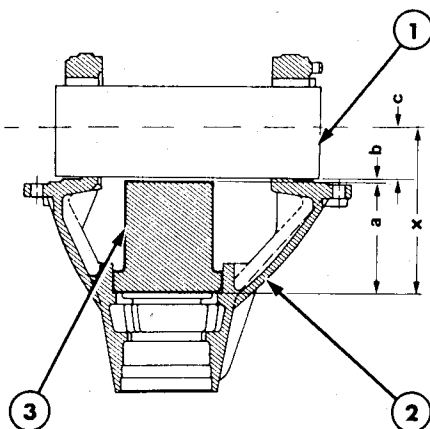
Diagram of pinion shimming tools and measuring points. Refer to text.
